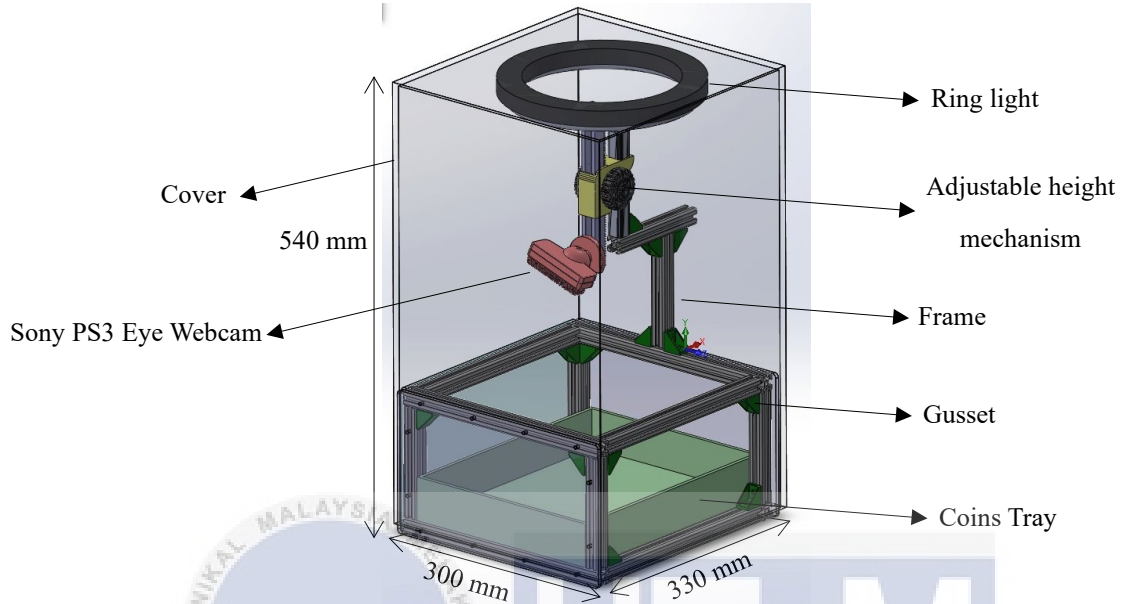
Assembly View of 3D CAD Model of Portable Coin Counting System Together with Dimensions
